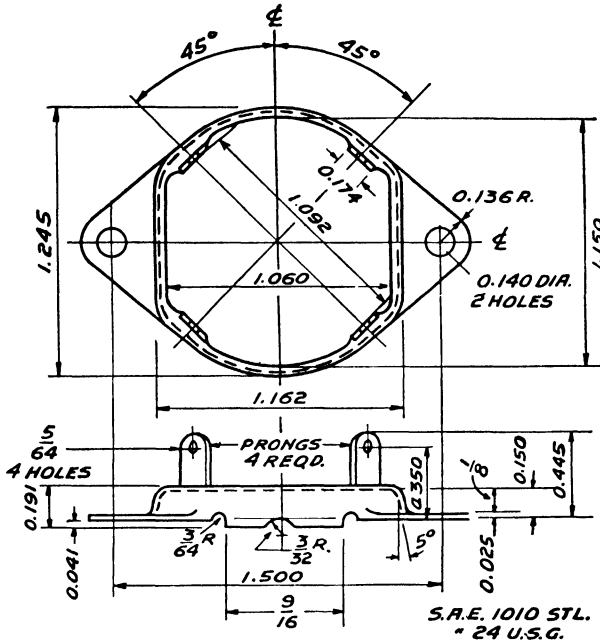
Dimensions and specifications of the work produced by the die shown in Fig. 87. The piece is called a "socket bracket."
